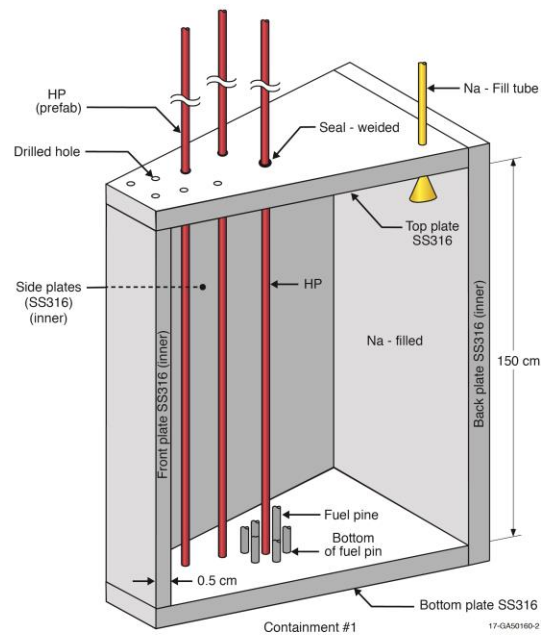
Design B inner tank which contains the fuel pins, heat pipes, and liquid metal sodium.
